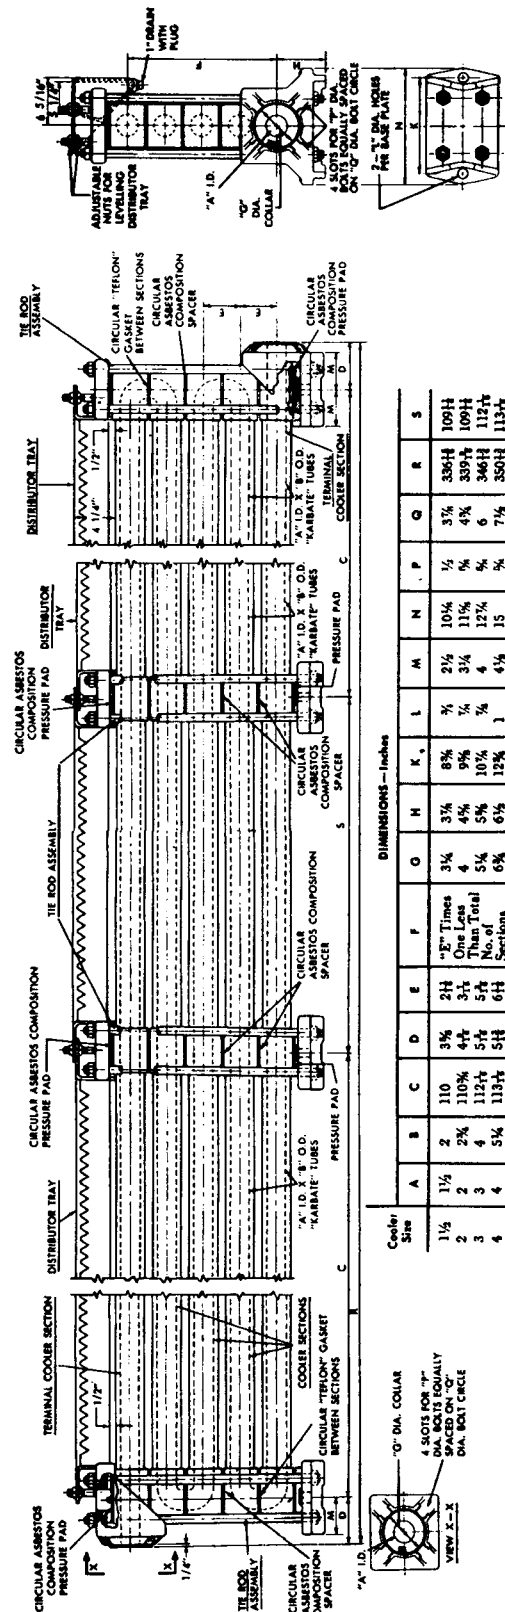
Typical sectional cooler using assembly of standardized components. (Used by permission: SGL Technic, Inc., Karbate® Division.)
